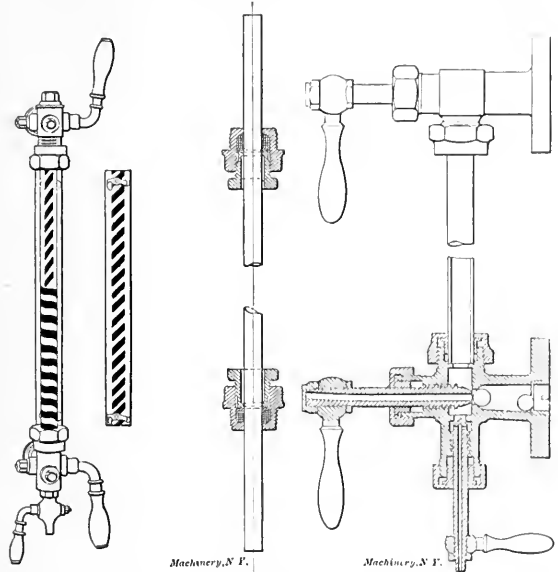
Cooper Bended Water Glass. Fig. 2. Berthelot's Removable Packing Boxes. Fig. 4. Dumay Gage Cock with Hollow Handle for Cleaning.
